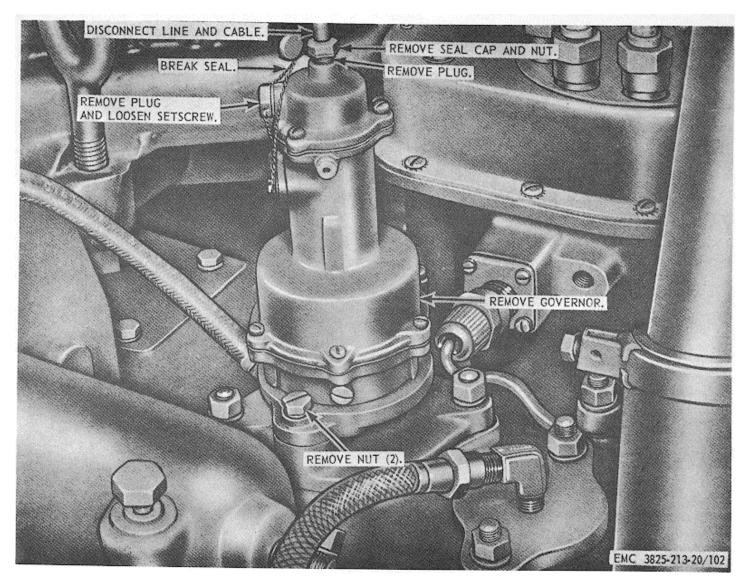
Plow and carrier engine speed governor assembly, removal and installation.
